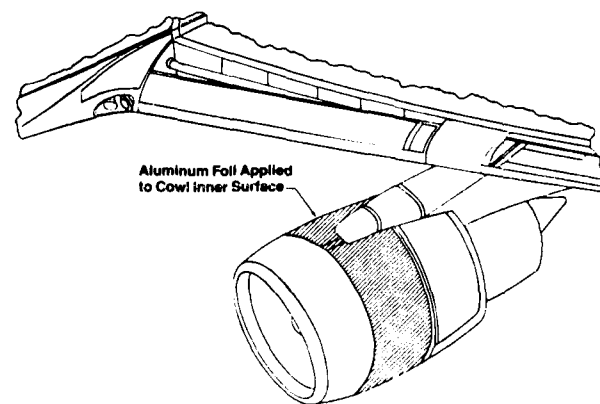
Aluminum Foil on Fan Cowl Inner Surface
